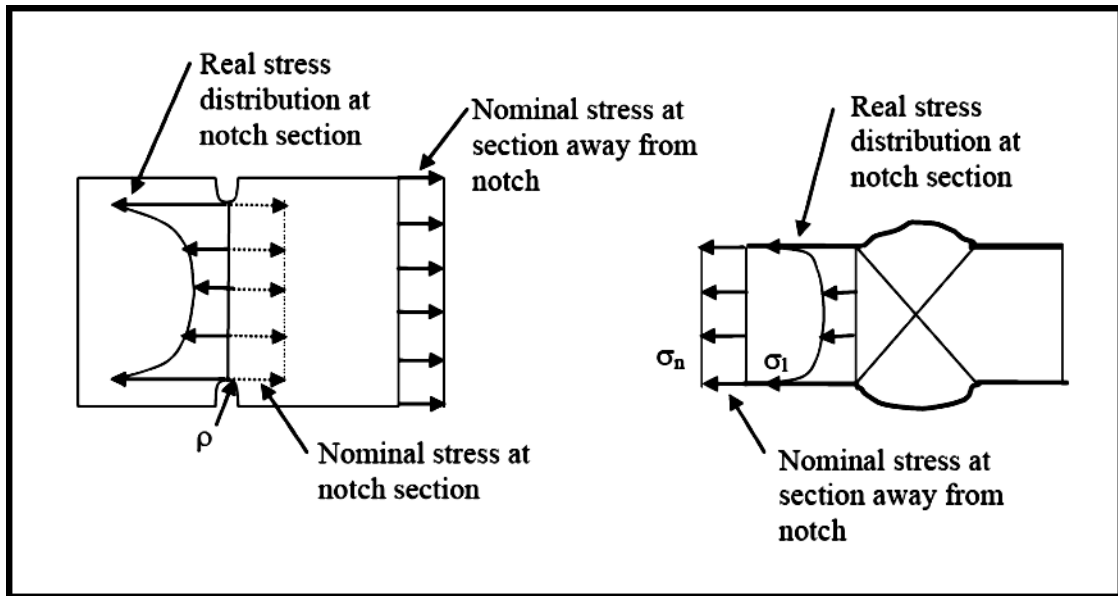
Stress concentrations. Left: plate with edge notches. Right: butt weld joint.<sup>[2]</sup>
